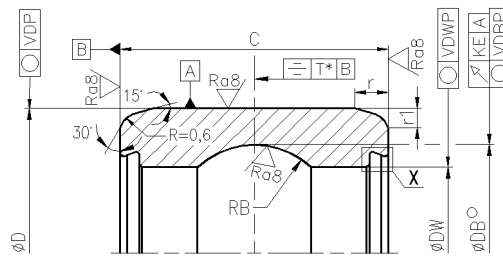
Dimensions of outer ring of the bearing 114-1506TNG-2Z
